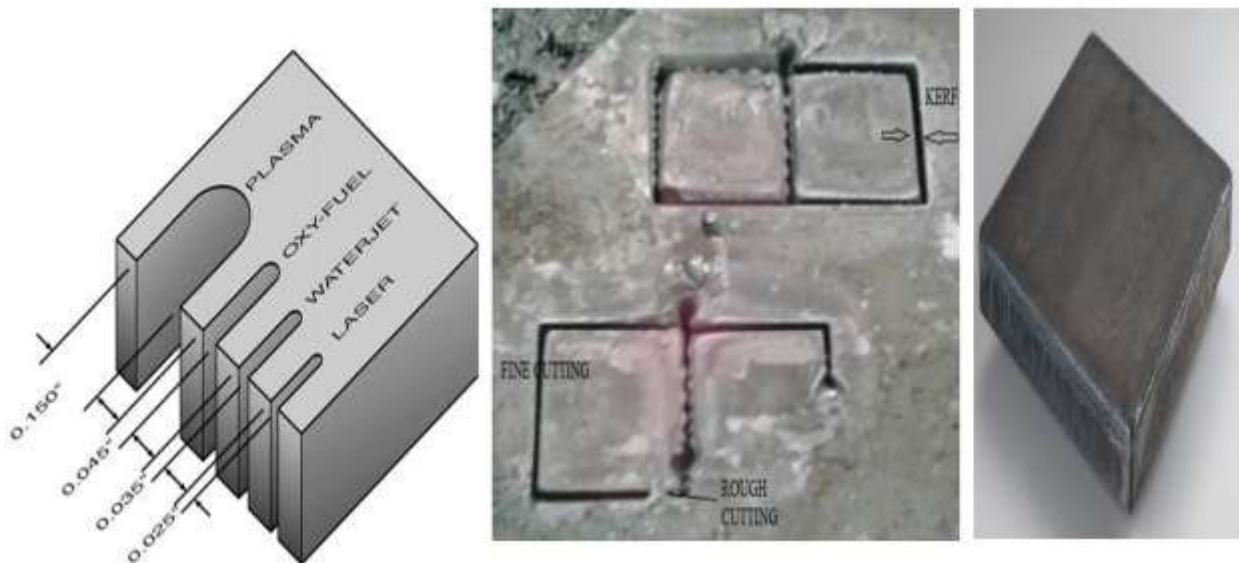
CNC Plasma Cutting Workpiece With Kerf
